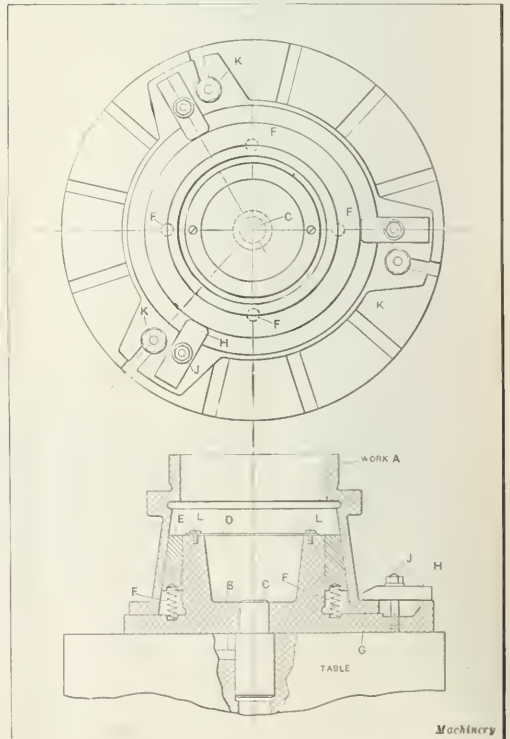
Simple Fixture for holding Work with Internal Tapered Surface
